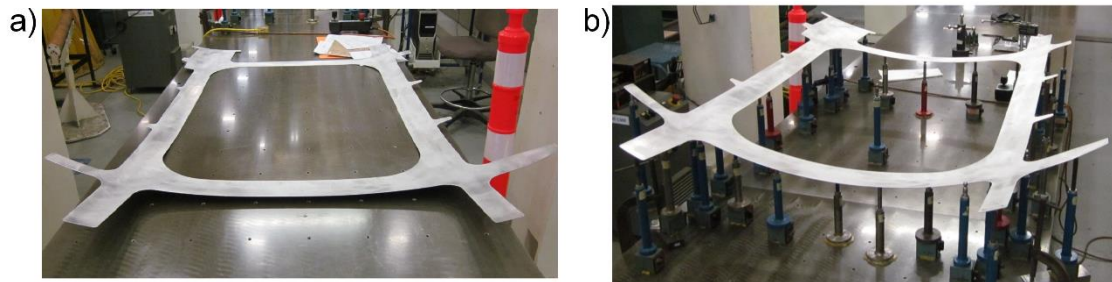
A regular aerospace panel, a) in free-state, b) constrained by fixing jigs on the inspection fixture [2].
